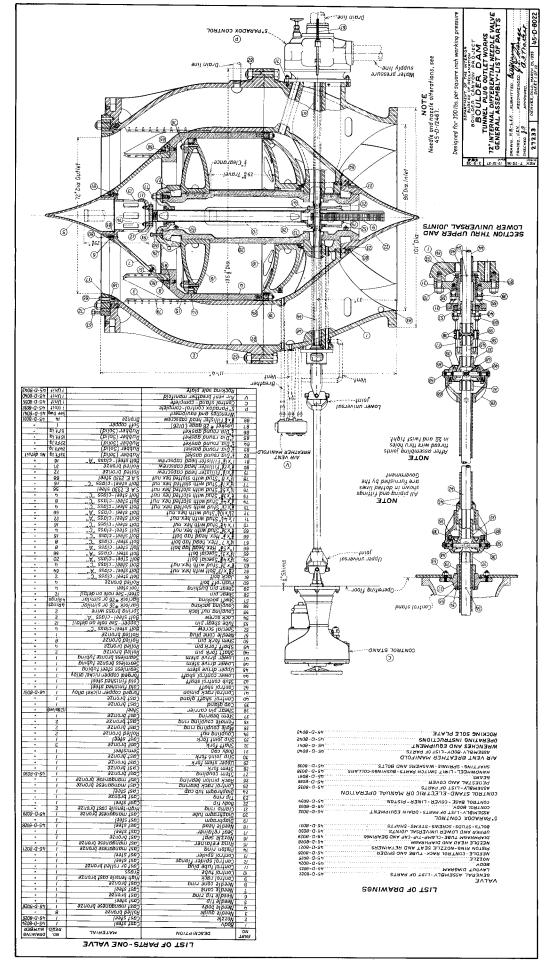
Drawing 45-D-8022, general assembly of 72-inch internal differential needle valve.
